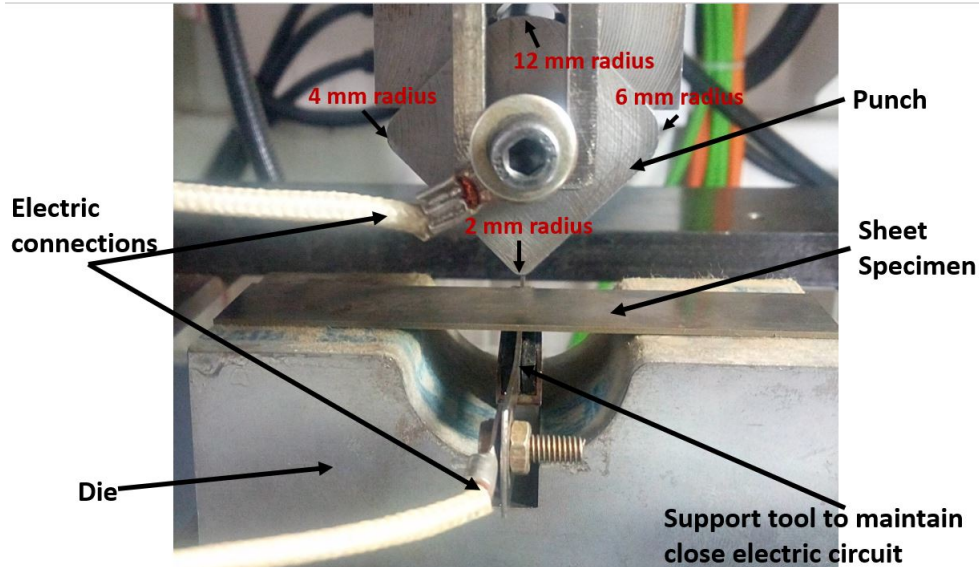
Close-up view of electric circuit completion between both tools and sheet
